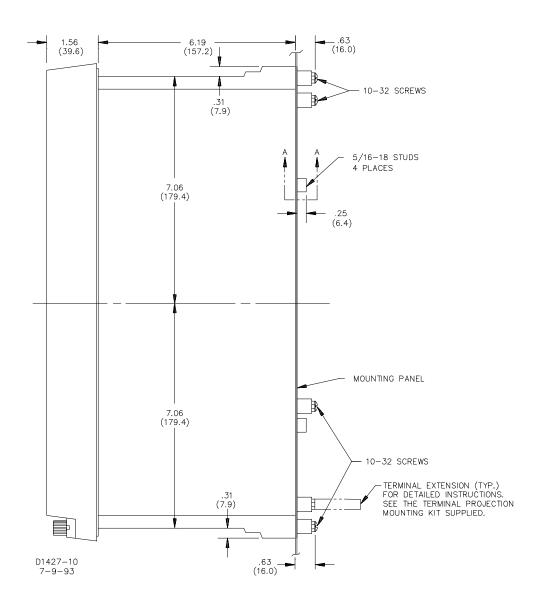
M1 Case, Double-Ended, Projection Mounting, Outline Dimensions, Side View
